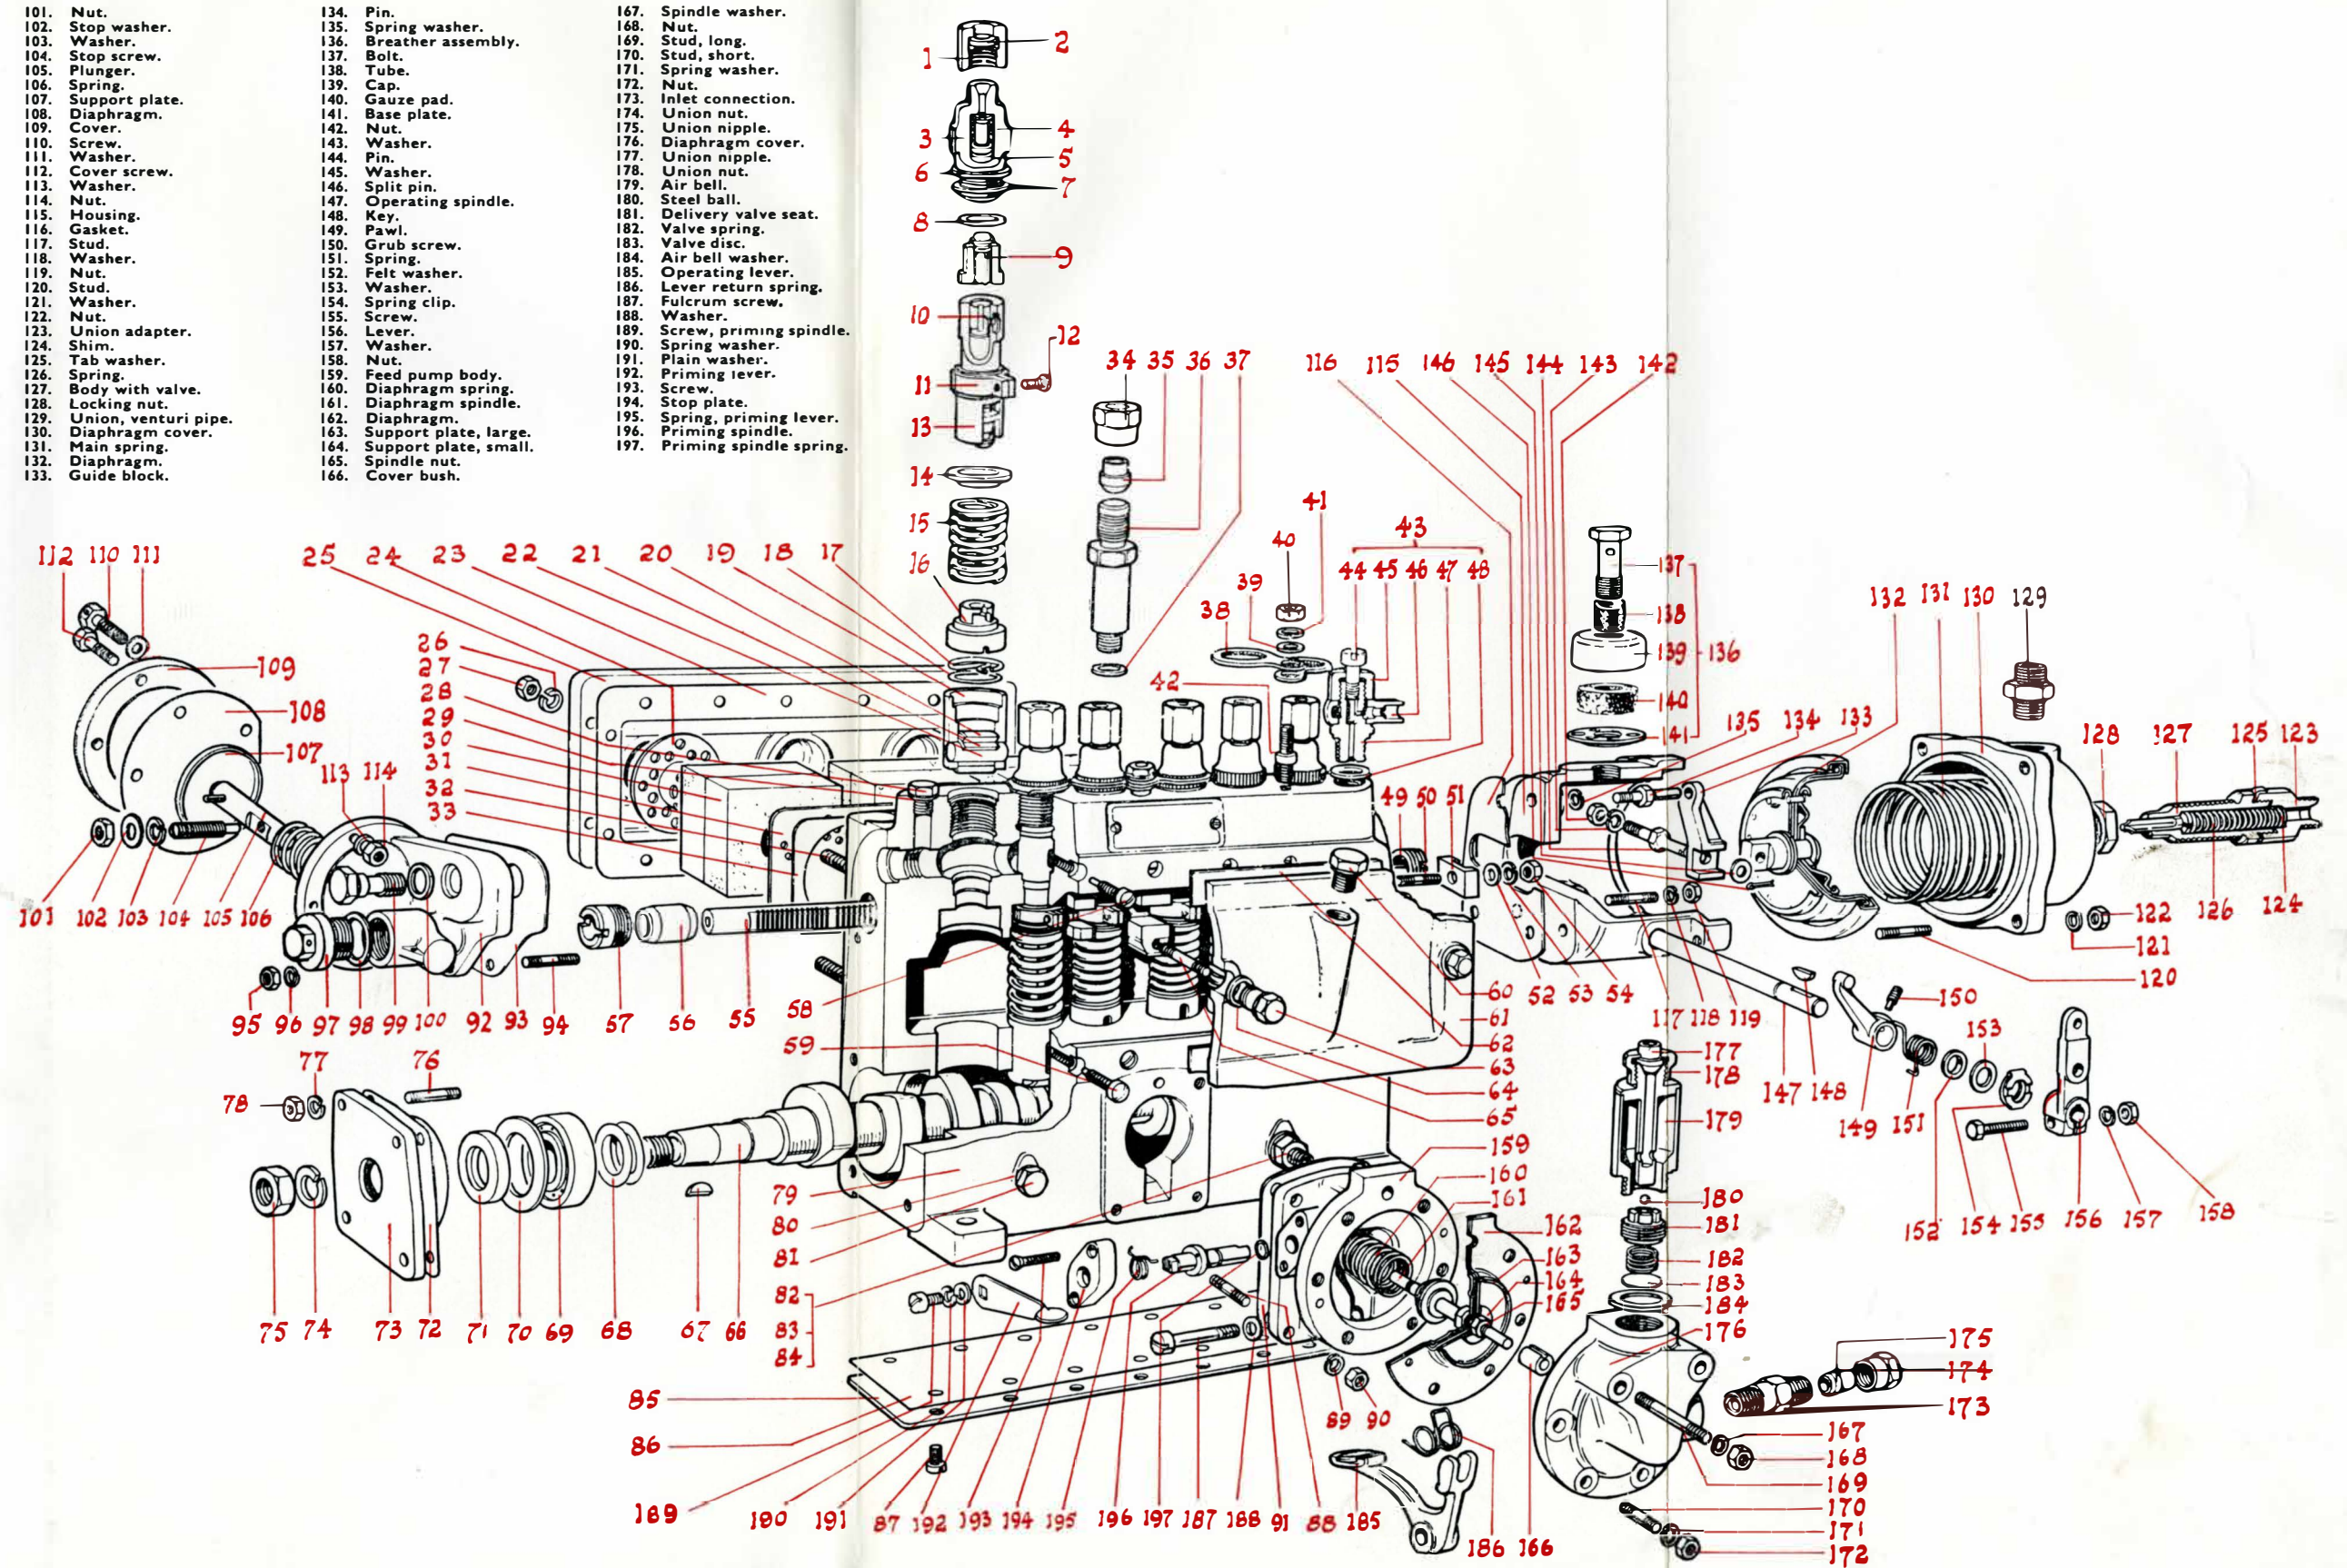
EXPLODED VIEW OF THE C.A.V. TYPE NL FUEL PUMP, with diaphragm-type excess fuel device
